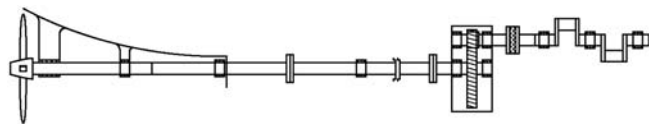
Schematic of a typical marine shaft line including a gearbox [1]
